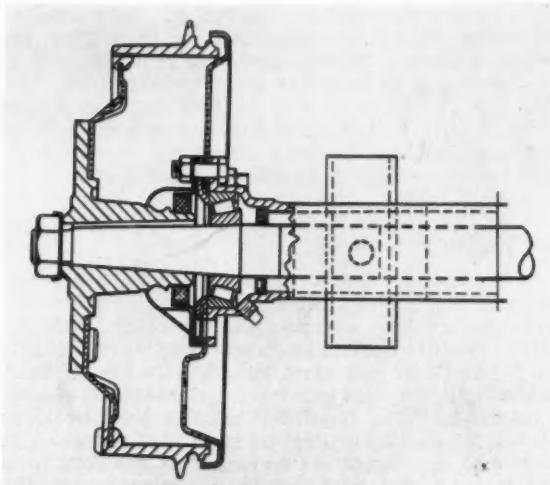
Annoying clicking sound in rear axle was found to be caused by slight inaccuracies in axle shaft taper and internal taper of hub. Correction was made by using type of axle shown in Fig. 3.
